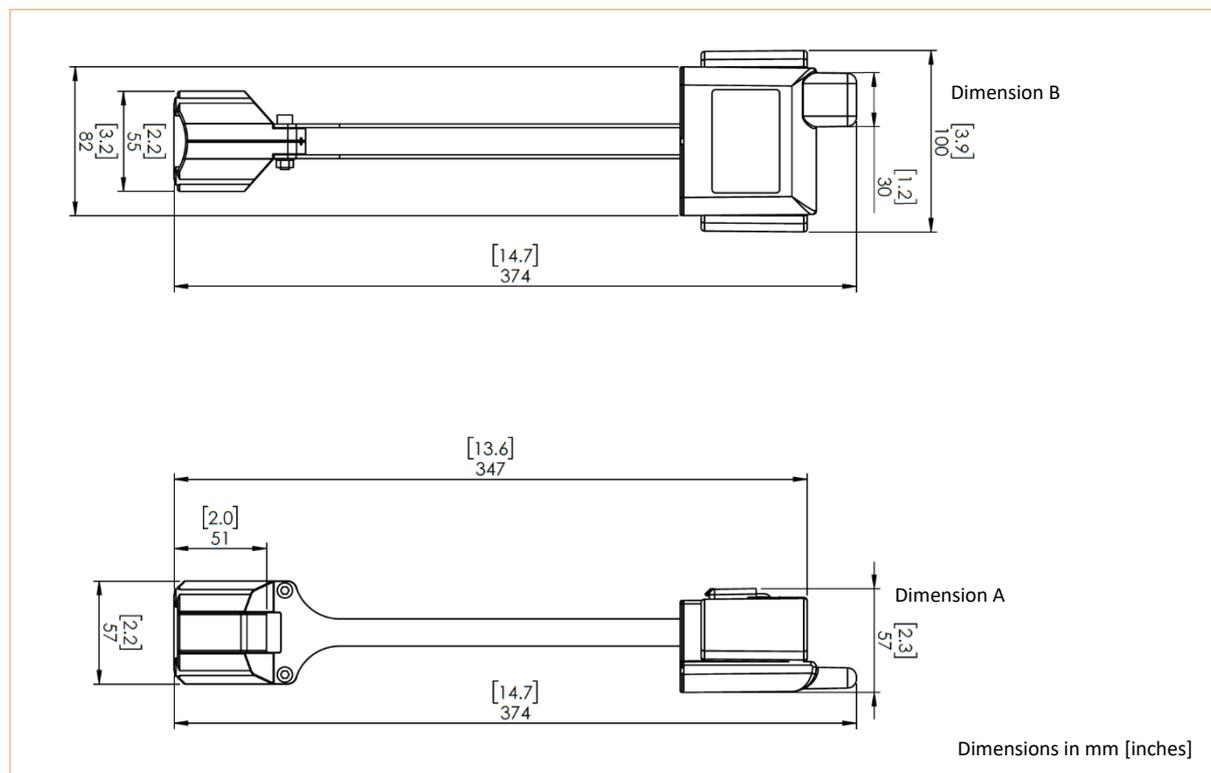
Dimensions of the ET410 sensor, shown with a BPI0E power module
